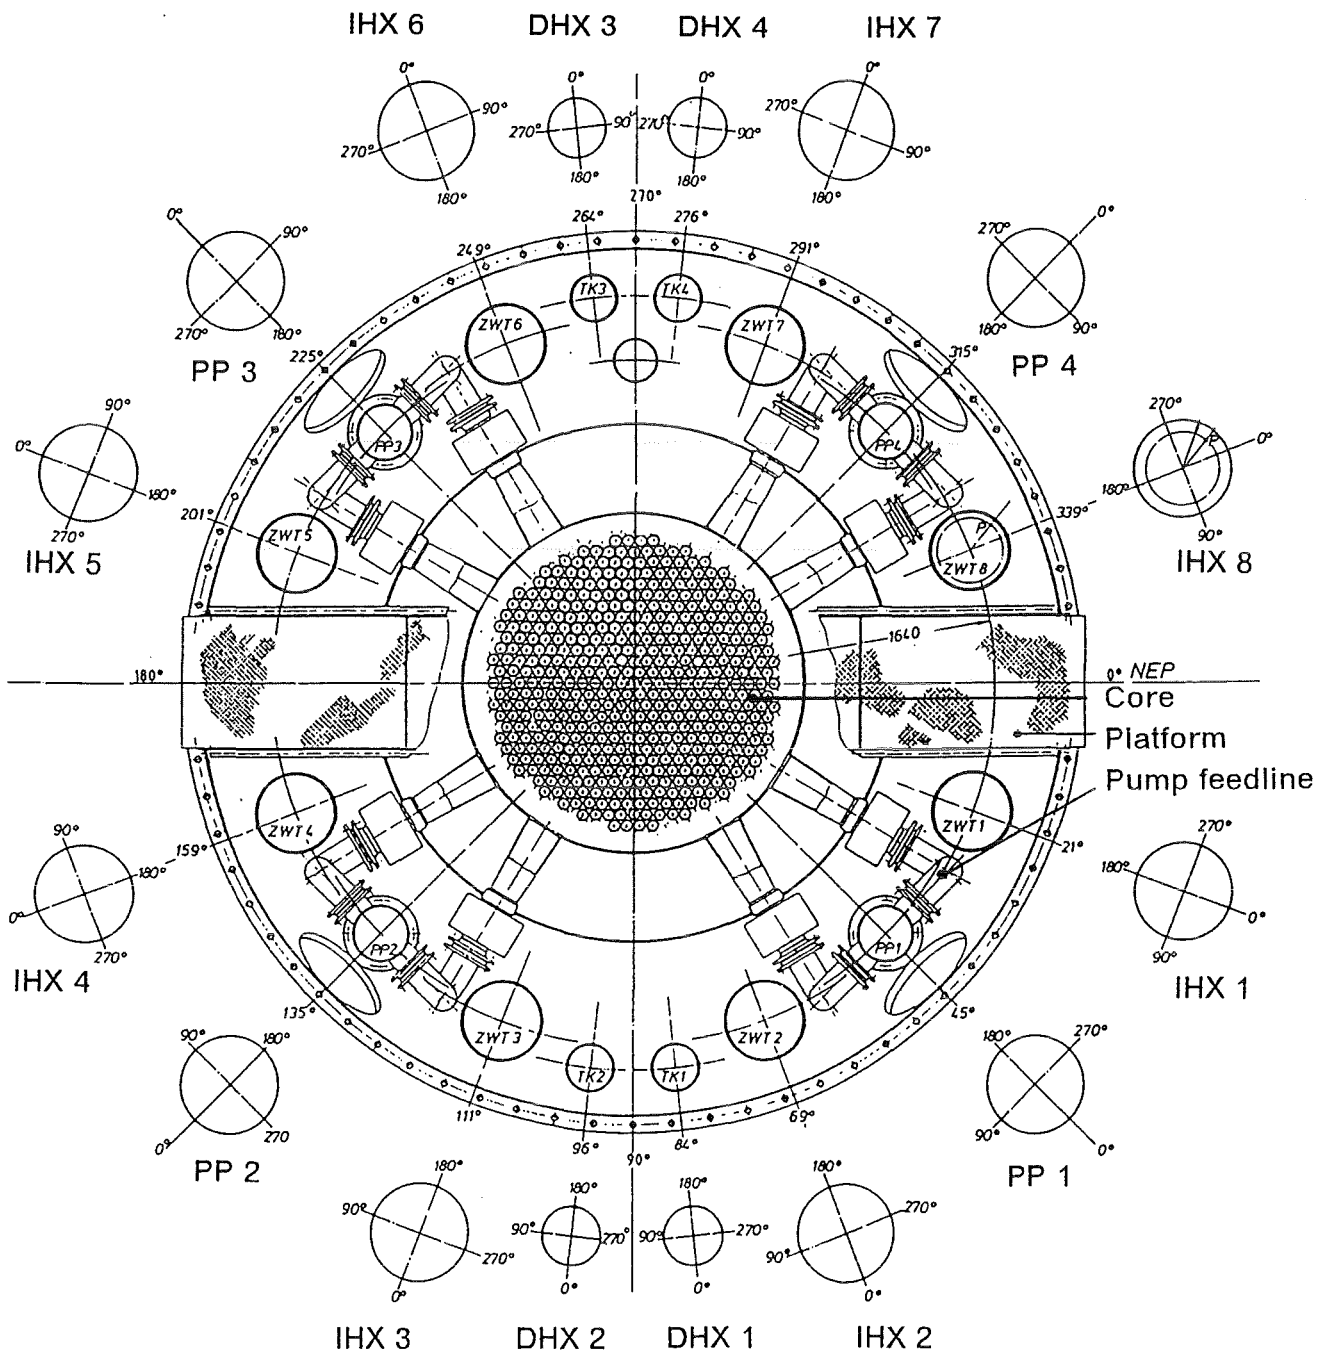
Horizontal cross-section of the NEPTUN test facility.
